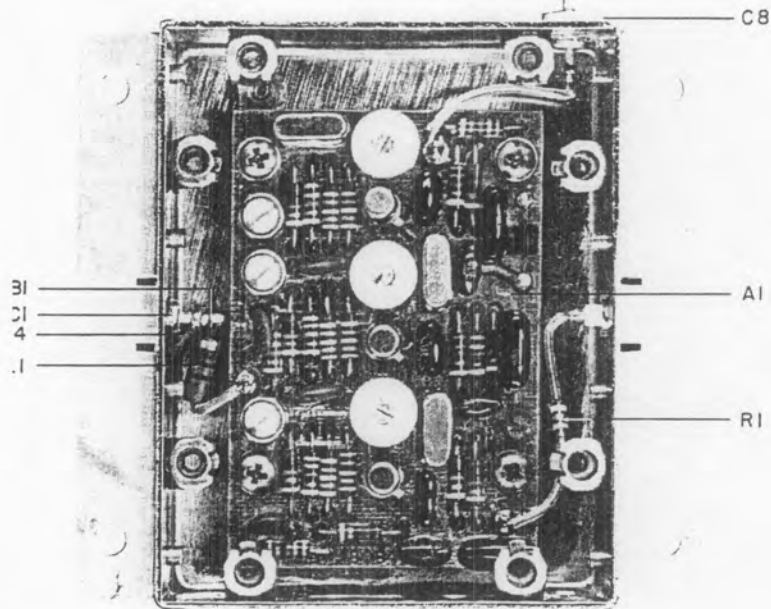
Type 7781 Oscillator Assembly (A3), Bottom View, Location of Components
